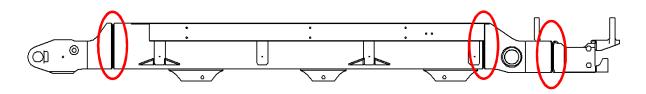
Typical weld locations of block connections to chassis with single weld around
